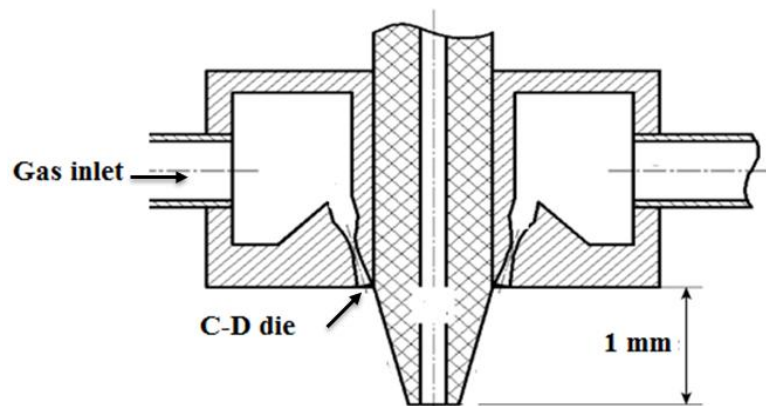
The cross section view of melt nozzle and HPGA gas die system used by XinMing [81].
